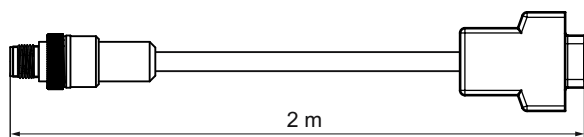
Connecting cable M12 ↔ sub-D (MOBY D)
